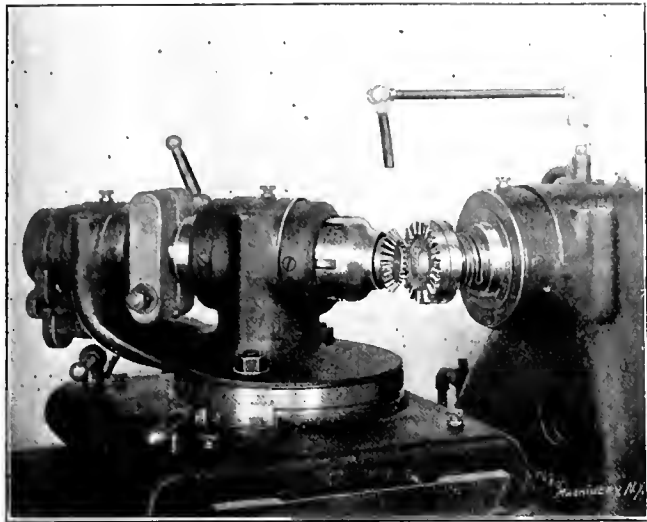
Near View of the Tool and the Work in the Machine shown in Fig. 163.
